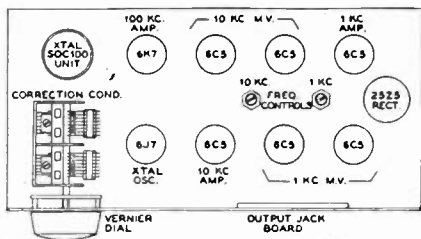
Mechanical layout of the standard, looking down on the chassis.
